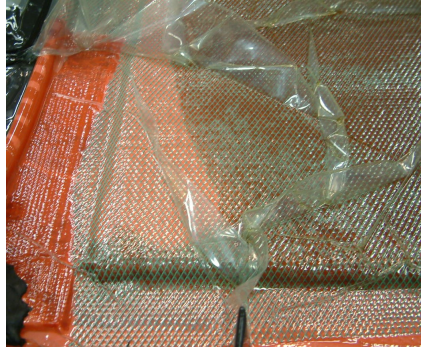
Vacuum infusion process for manufacturing of the hybrid laminate.
